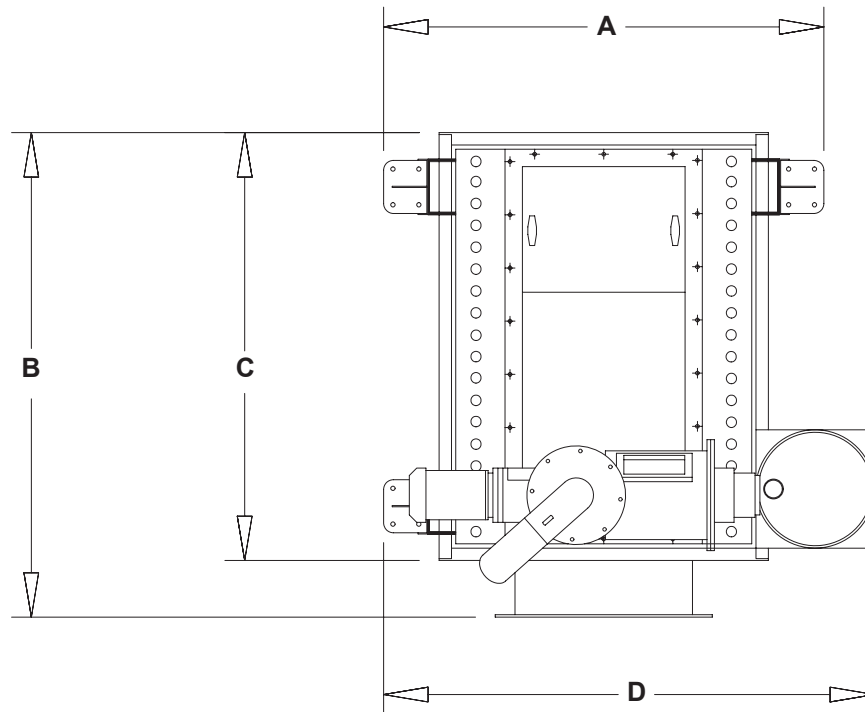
HTM Feed Hopper Dimensions (shown with HTM 36 with AZO sieve)
